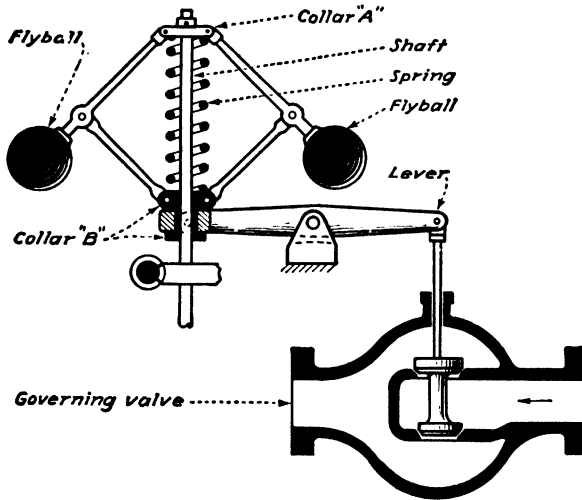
Flyballs linked solidly to steam valve must take a position corresponding to correct valve opening for every load from zero to full load. (Courtesy of Power.)
